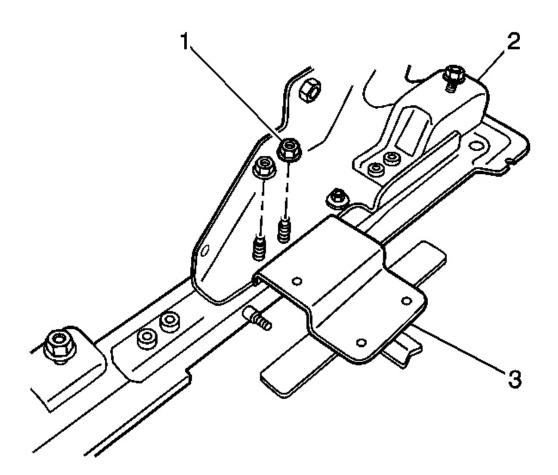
View Of Wire Harness & Seat Cushion Frame Nuts Courtesy of GENERAL MOTORS CORP.
